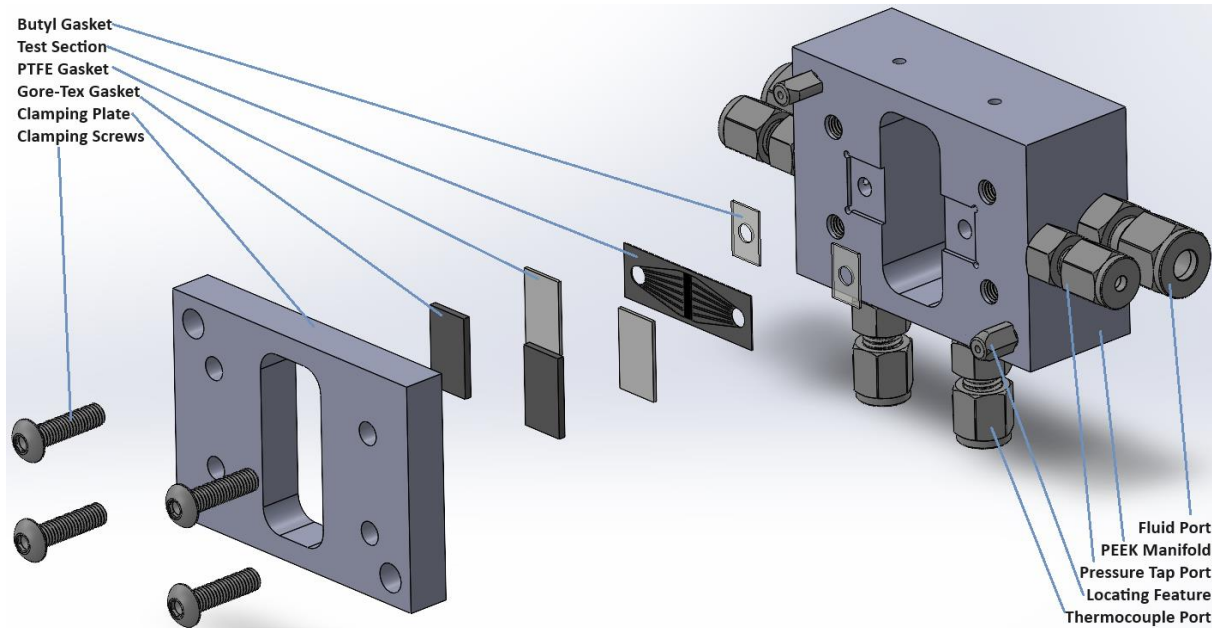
Exploded schematic of fluidic interface manifold for 38 μm test section.
